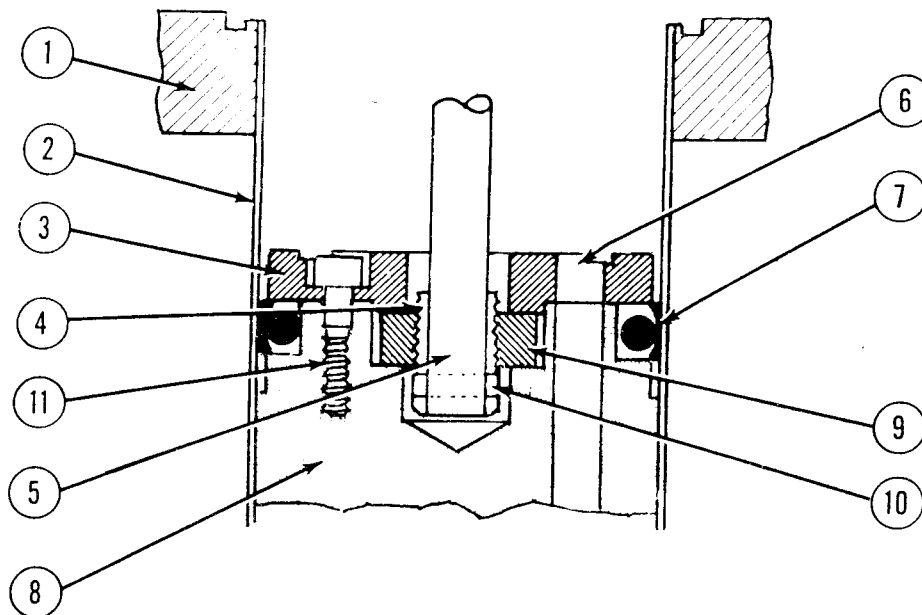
INSTALLING MOTOR BEARING (REAR END)
